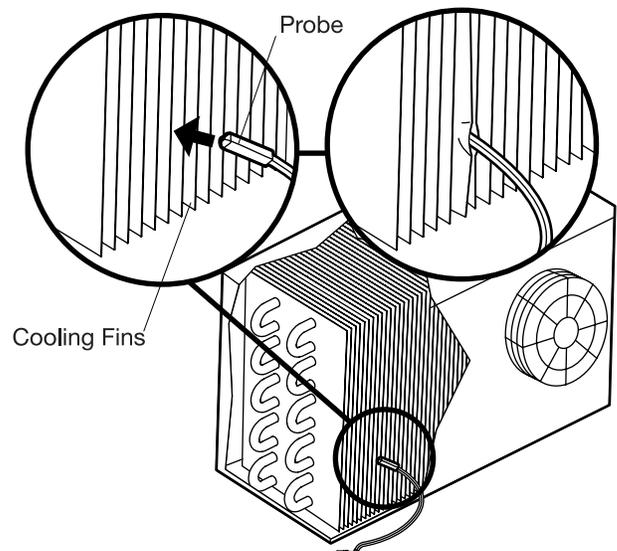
Insert Thermistor Probe between Evaporator Cooling Fins
